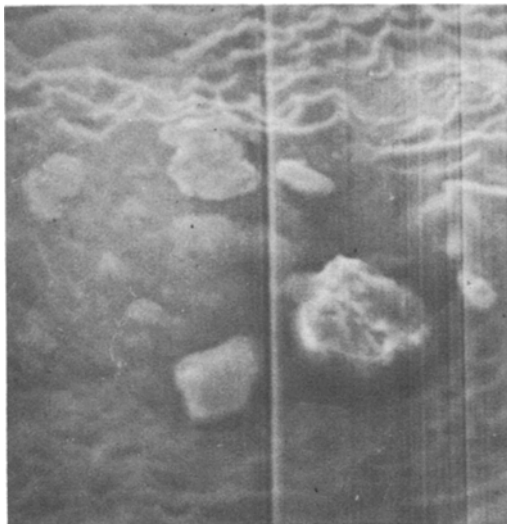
Fracture surface at the circumferential weld at the nozzle end – silicate inclusions (SEM) (750 X).
